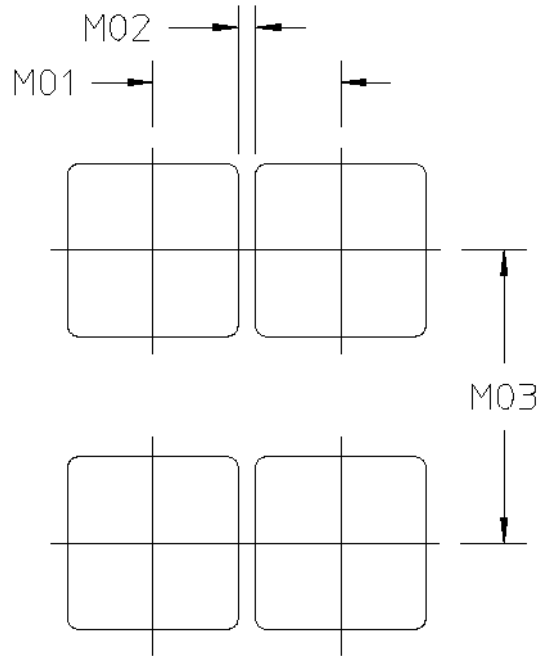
RECEPTACLE MINIMUM PITCH DIMENSIONS
